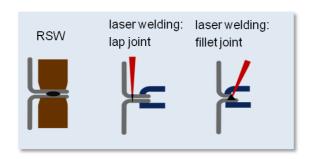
Scheme of welding position and required flange size for laser welds in comparison to resistive spot welding (RSW). Laser welding requires additional clamping (dark blue).
